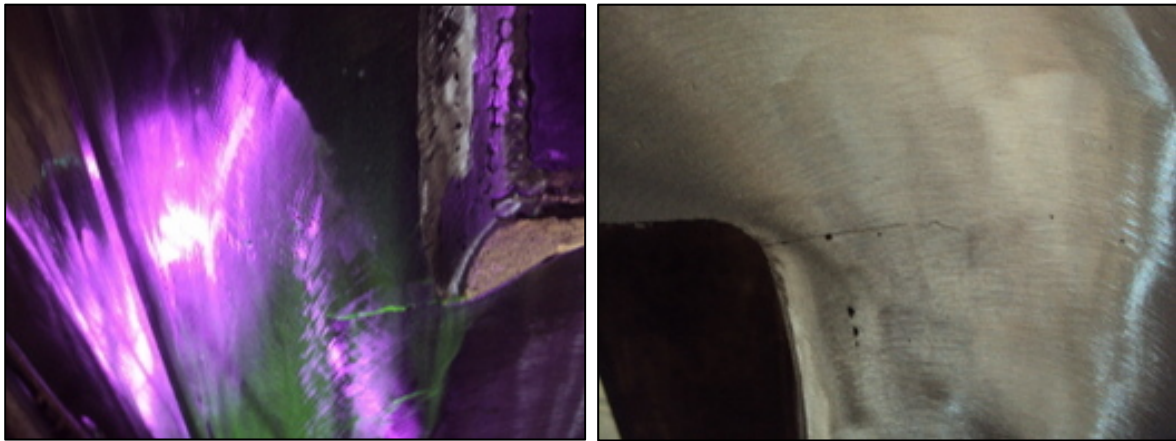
Francis turbine stay rings: cracks detected in structural welding by means of Magnetic Particle examination
